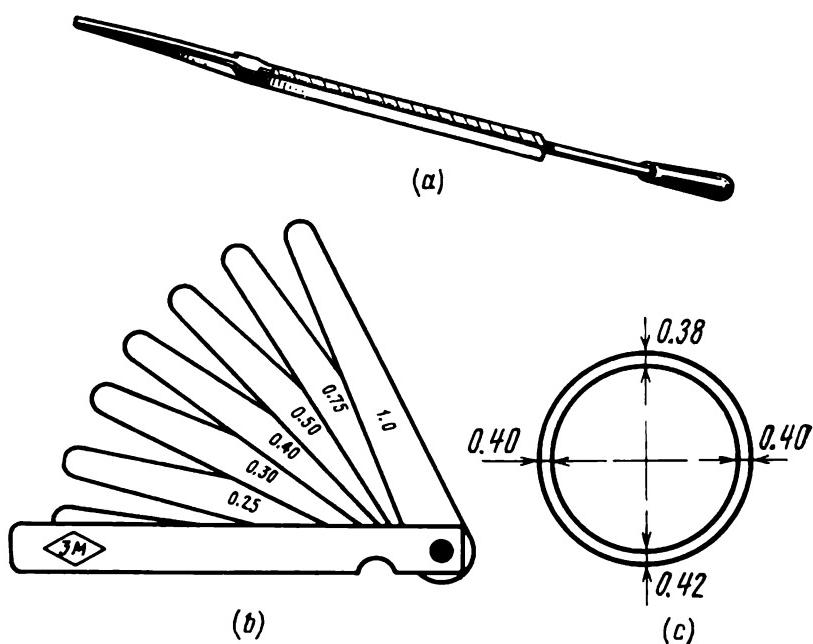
Feeler gauges for checking the air gap between the stator and the rotor and points of measurement
